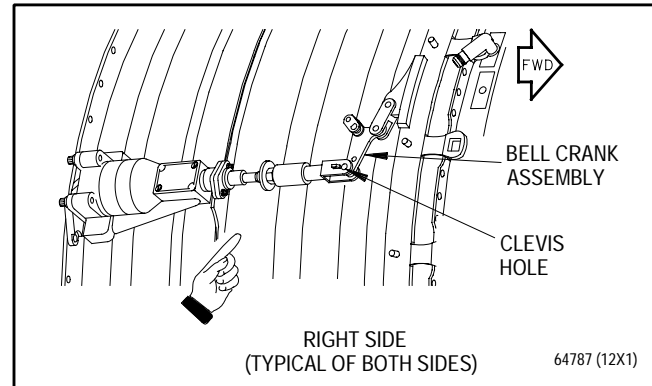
Compressor Inlet Variable Vane System - Rigging (Sheet 2 of 6)
